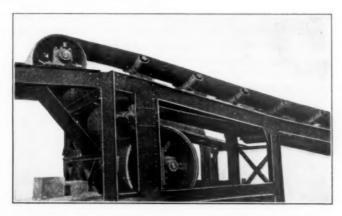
HEAD DRIVE-DRIVING DONE BY LARGER PULLEY
